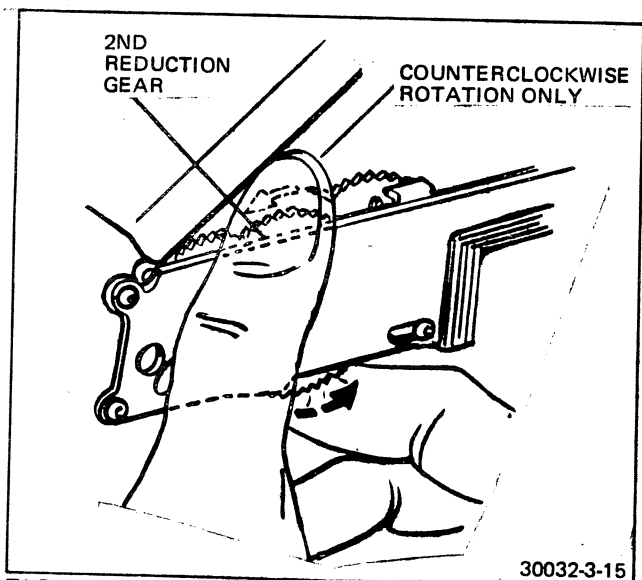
ROTATING 2ND REDUCTION GEAR
